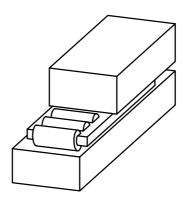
Non-recirculating linear roller bearing, linear guideway, flat type
